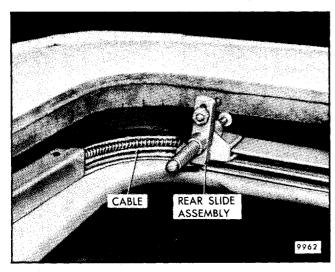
Drive Cable and Slide Assembly Pulled Forward - E and K Styles
